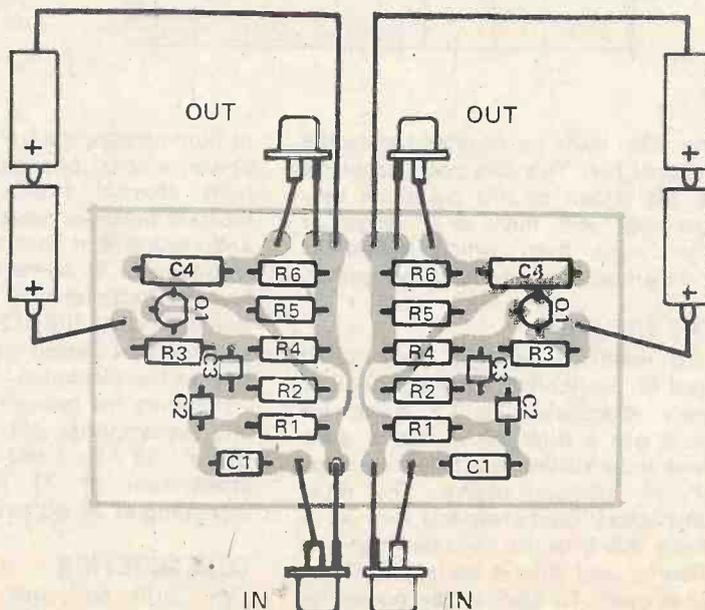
Printed circuit board layout for the rumble filter 40mm x 70mm.
